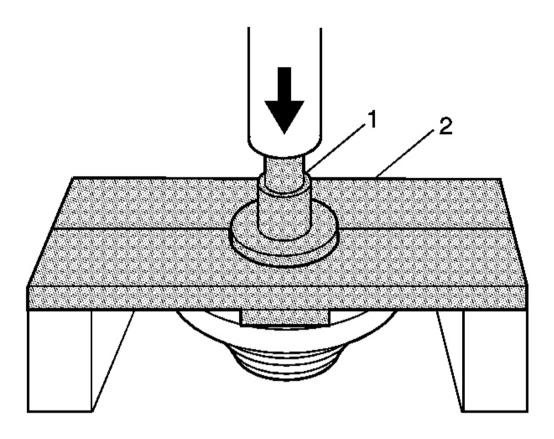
Removing Left Differential Side Bearing Courtesy of GENERAL MOTORS CORP.
